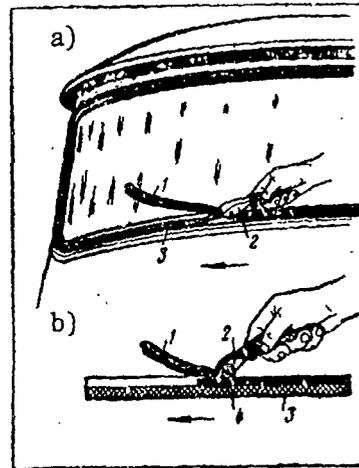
Installation of Rubber Sealing Strip in Windshield Gasket of ZIL-130 and ZIL-131: a, installation of sealing tool with sealing strip in gasket slot; b, installation and rolling of rubber sealing strip into gasket slot; 1, rubber sealing strip; 2, installation tool; 3, glass sealing gasket; 4, roller of installation tool
